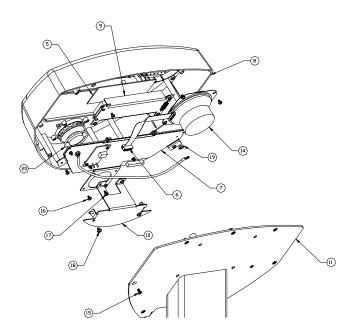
Front Cover Of Bowler Terminal Exposing Parts To Be Installed
